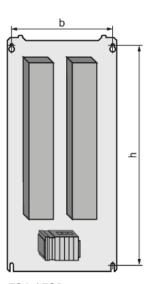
Dimension drawing of braking resistor for PM240-2, frame sizes FSA / FSB
